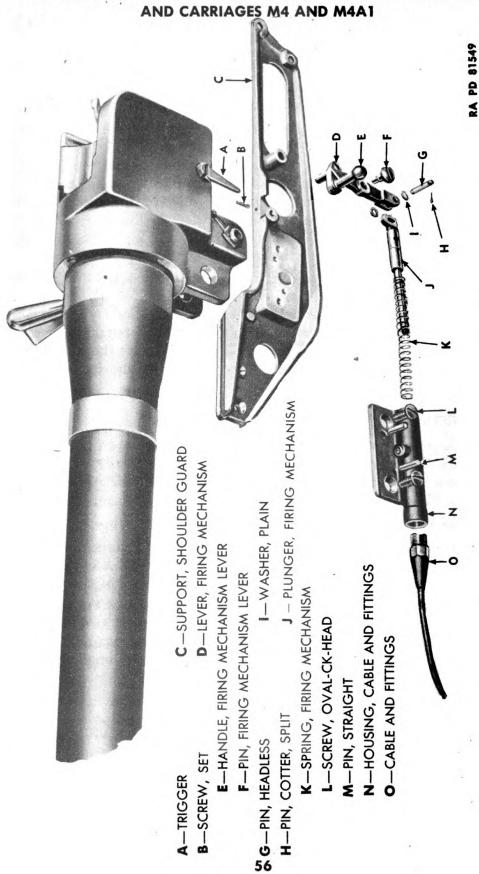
Firing Mechanism Group Parts on Carriage M4 - Exploded View
